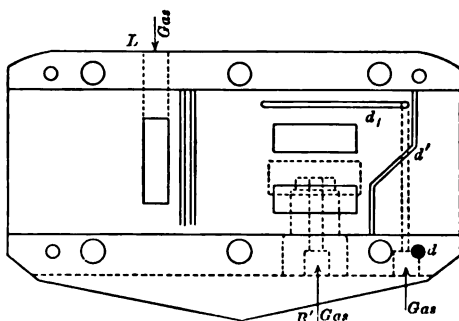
Otto Engine—Vertical View of Slide Cover.
